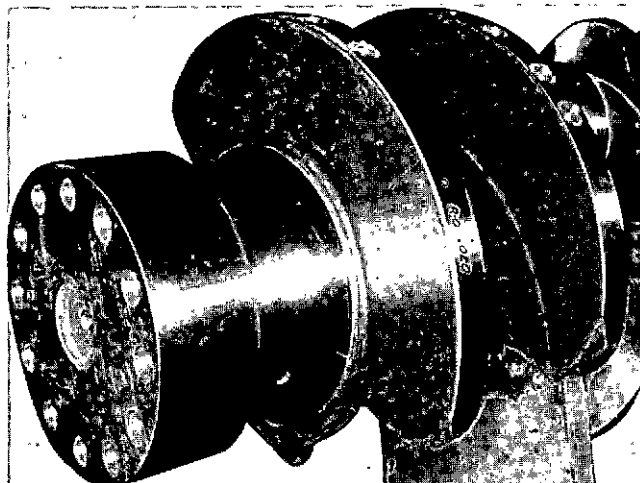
, V40182. Oversize thrust bearing size mark on crankshaft
